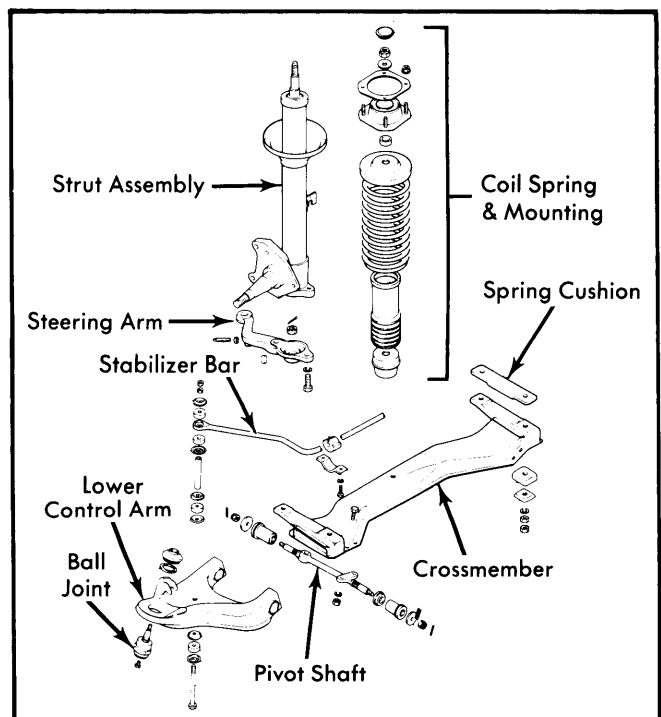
Exploded View of RX4 & Cosmo Front Suspension
